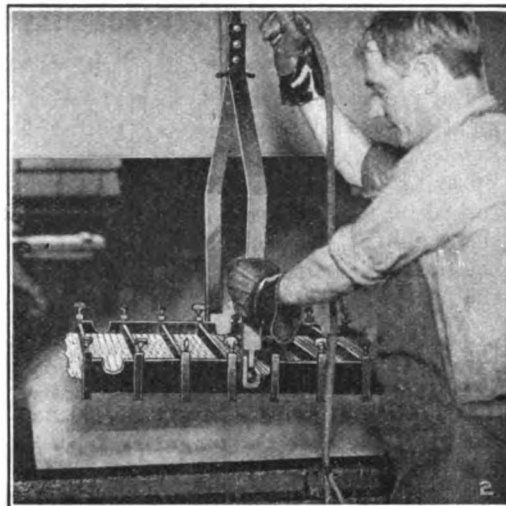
ASSEMBLING THE STRIPS IN FRAME. FIG. 2—SOLDERING THE STRIPS TOGETHER
